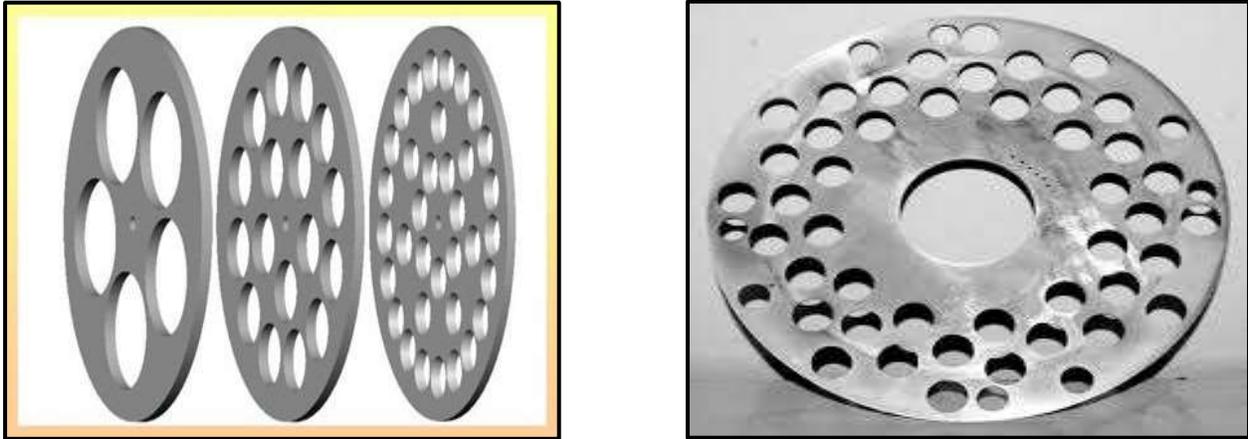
Shows the disks for the multi-disc cutting machine. Right: the shape of one of these discs. Left: the three disks with different slots [53, 54,].
